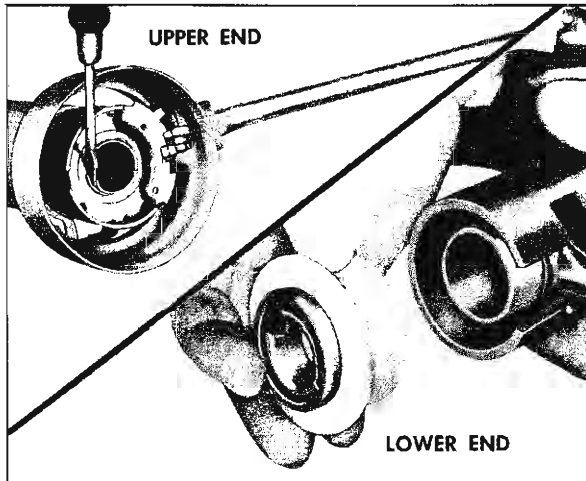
Shift Tube Retainer Ring, Washer and Lower Bushing
